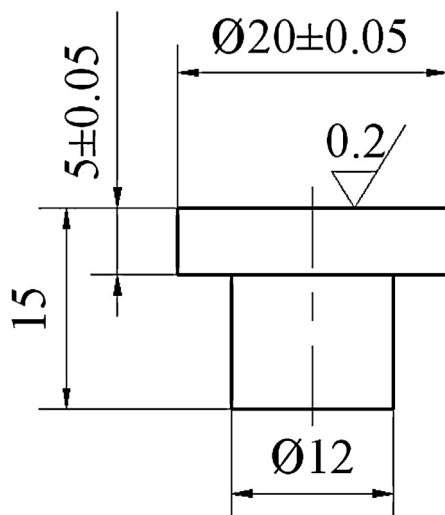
Dimensions and tolerances of the test sample.
